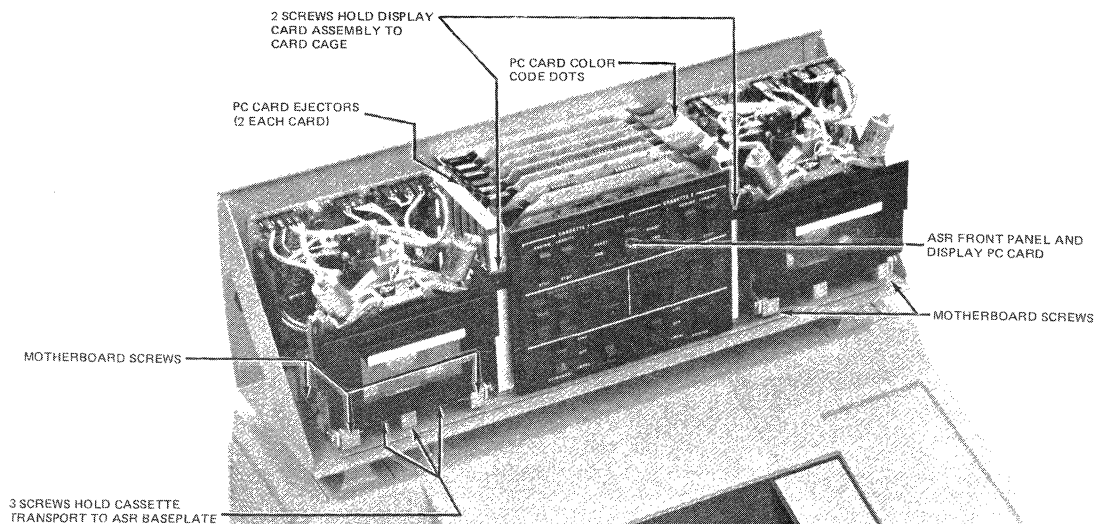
ASR UPPER UNIT REMOVAL AND REPLACEMENT (FRONT VIEW)
